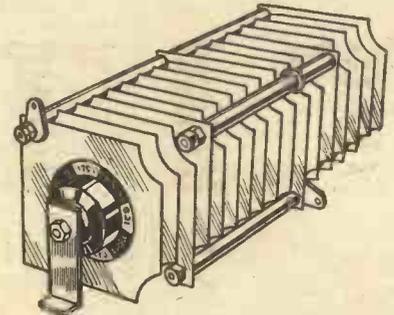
A complete metal rectifier assembled from units such as the one in Fig. 3.
